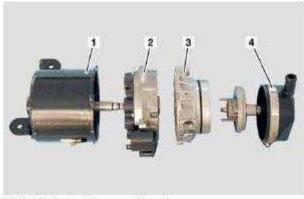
EHPS Motor Assembly Courtesy of BMW OF NORTH AMERICA, INC.
